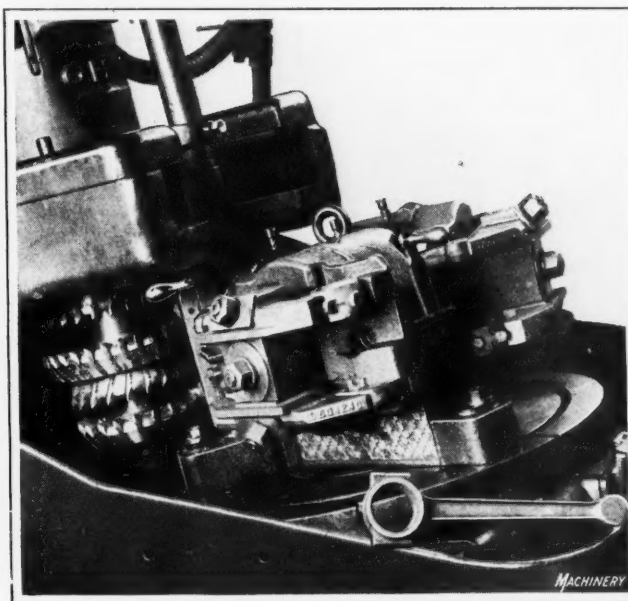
"Two-story" Milling Fixture of the Indexing Type for holding Connecting-rods
